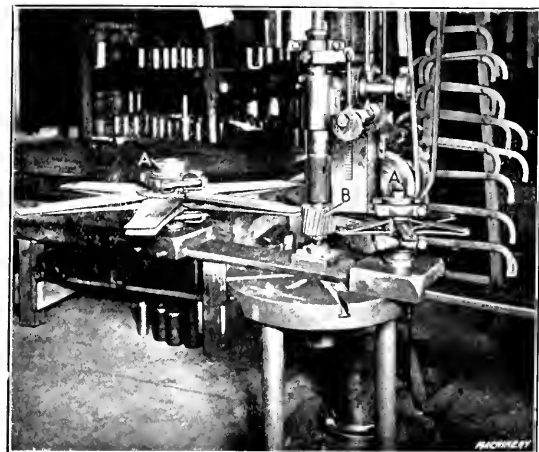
Machine for milling Ends of Spider Arms to a Uniform Radius
